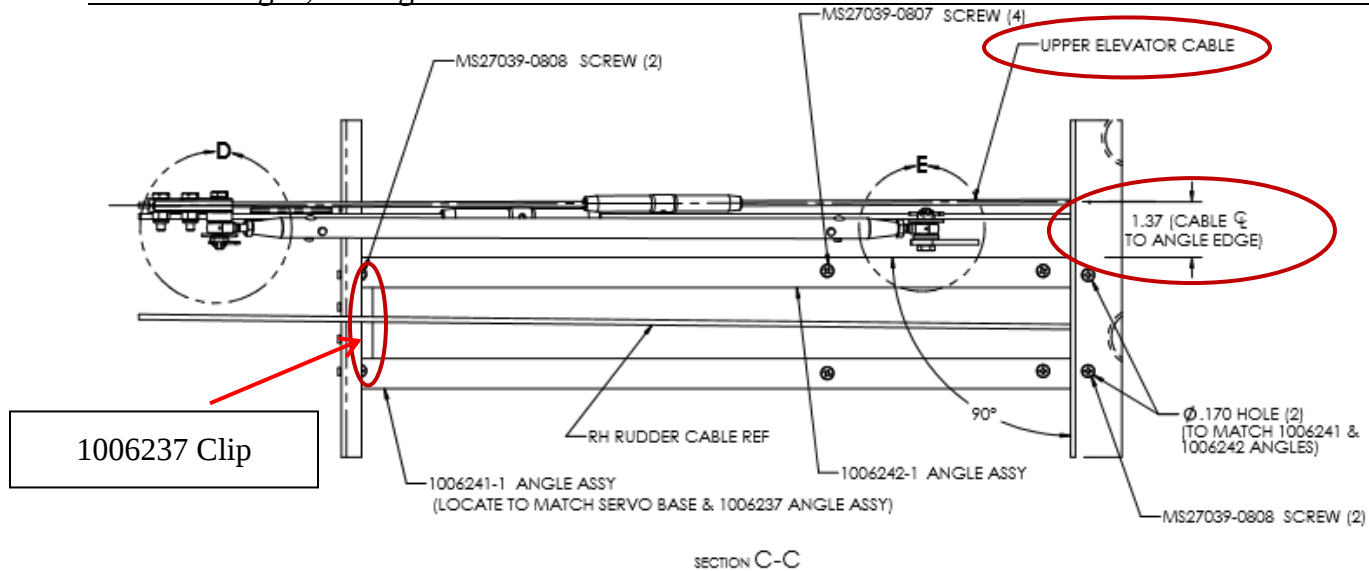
ANGLE TO BRACKET CLEARANCES
